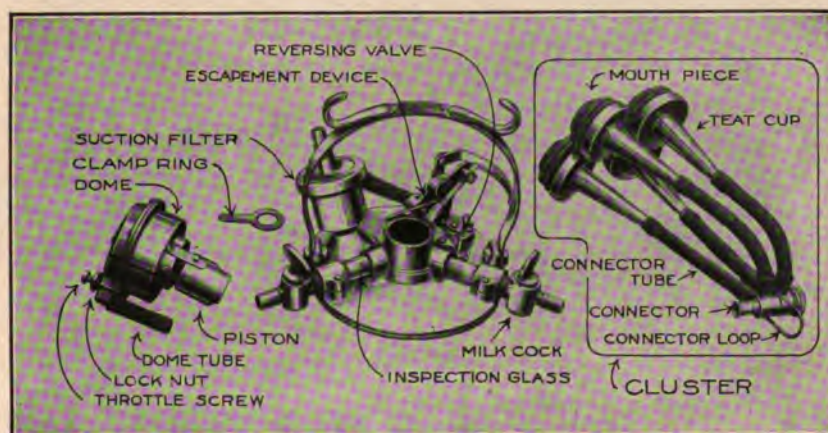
PULSATOR PARTS OF BURRELL-LAWRENCE-KENNEDY MILKING MACHINE.
